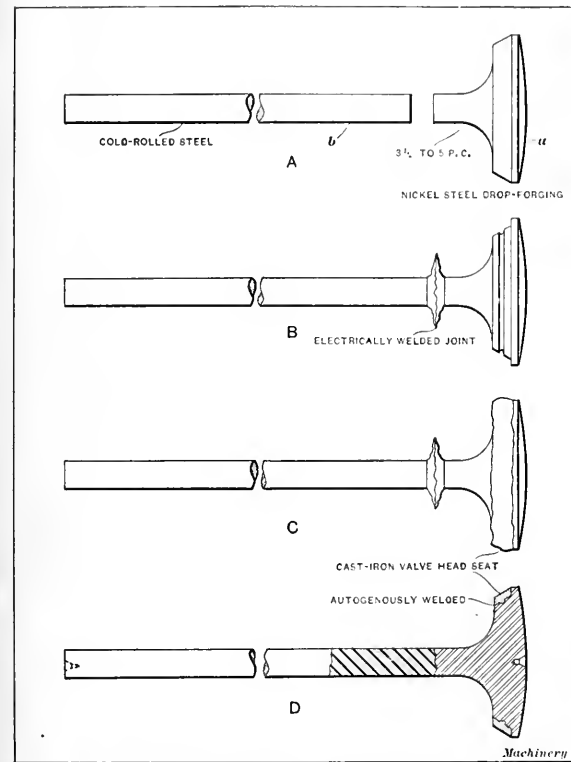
Various Stages of Manufacture through which an Improved Poppet Valve passes
